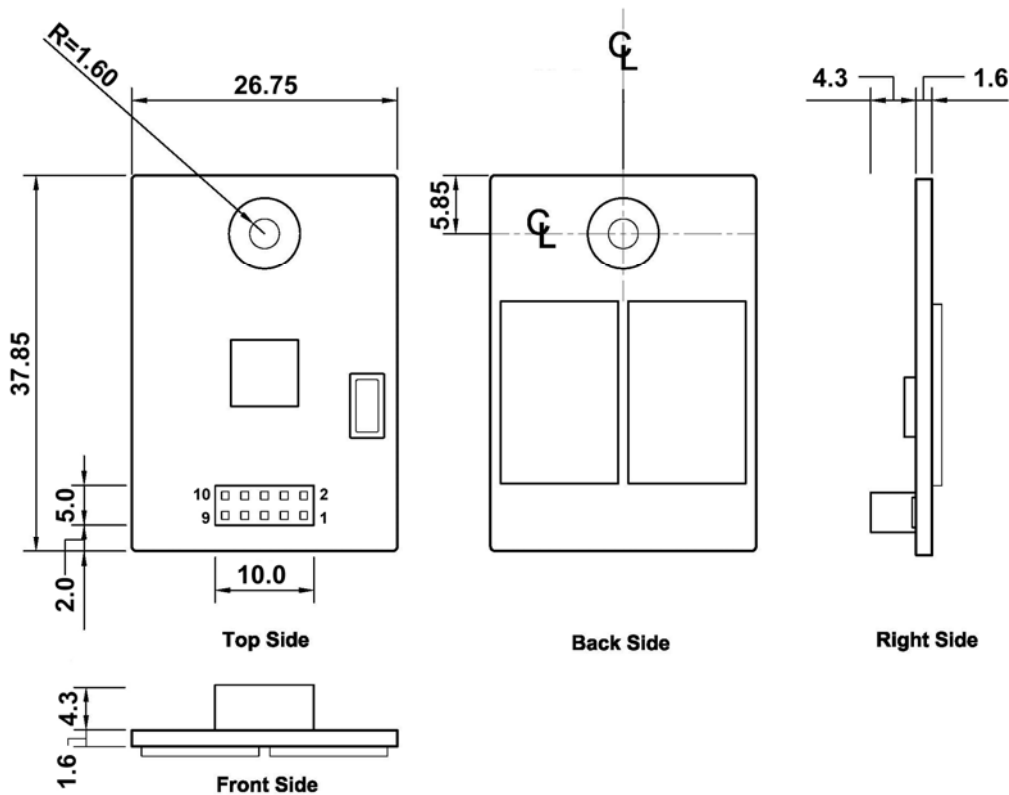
Industrial USB Disk Module Horizontal Type – Low Profile Form factor Dimension
